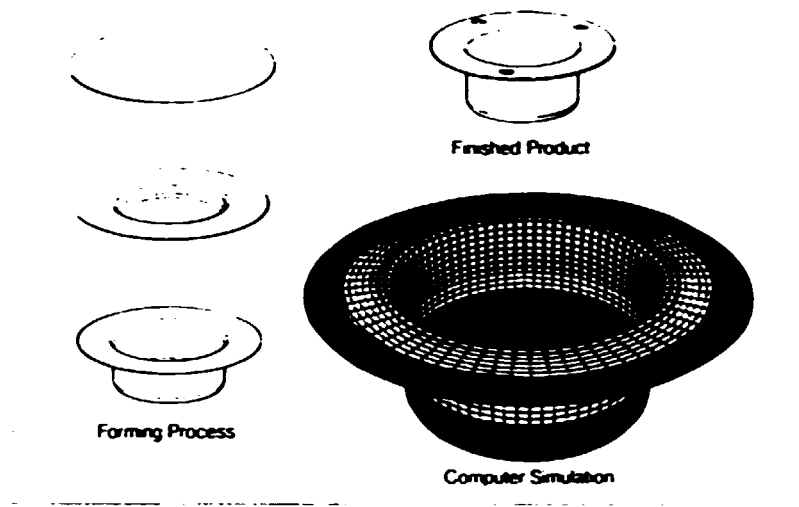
Simulating the deep drawing of a sheet metal cup .
